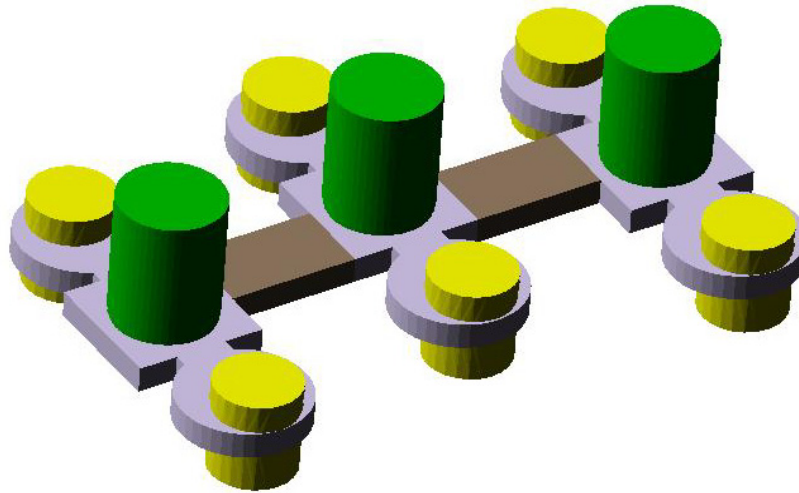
Final casting configuration, shown in MAGMASoft⁴
